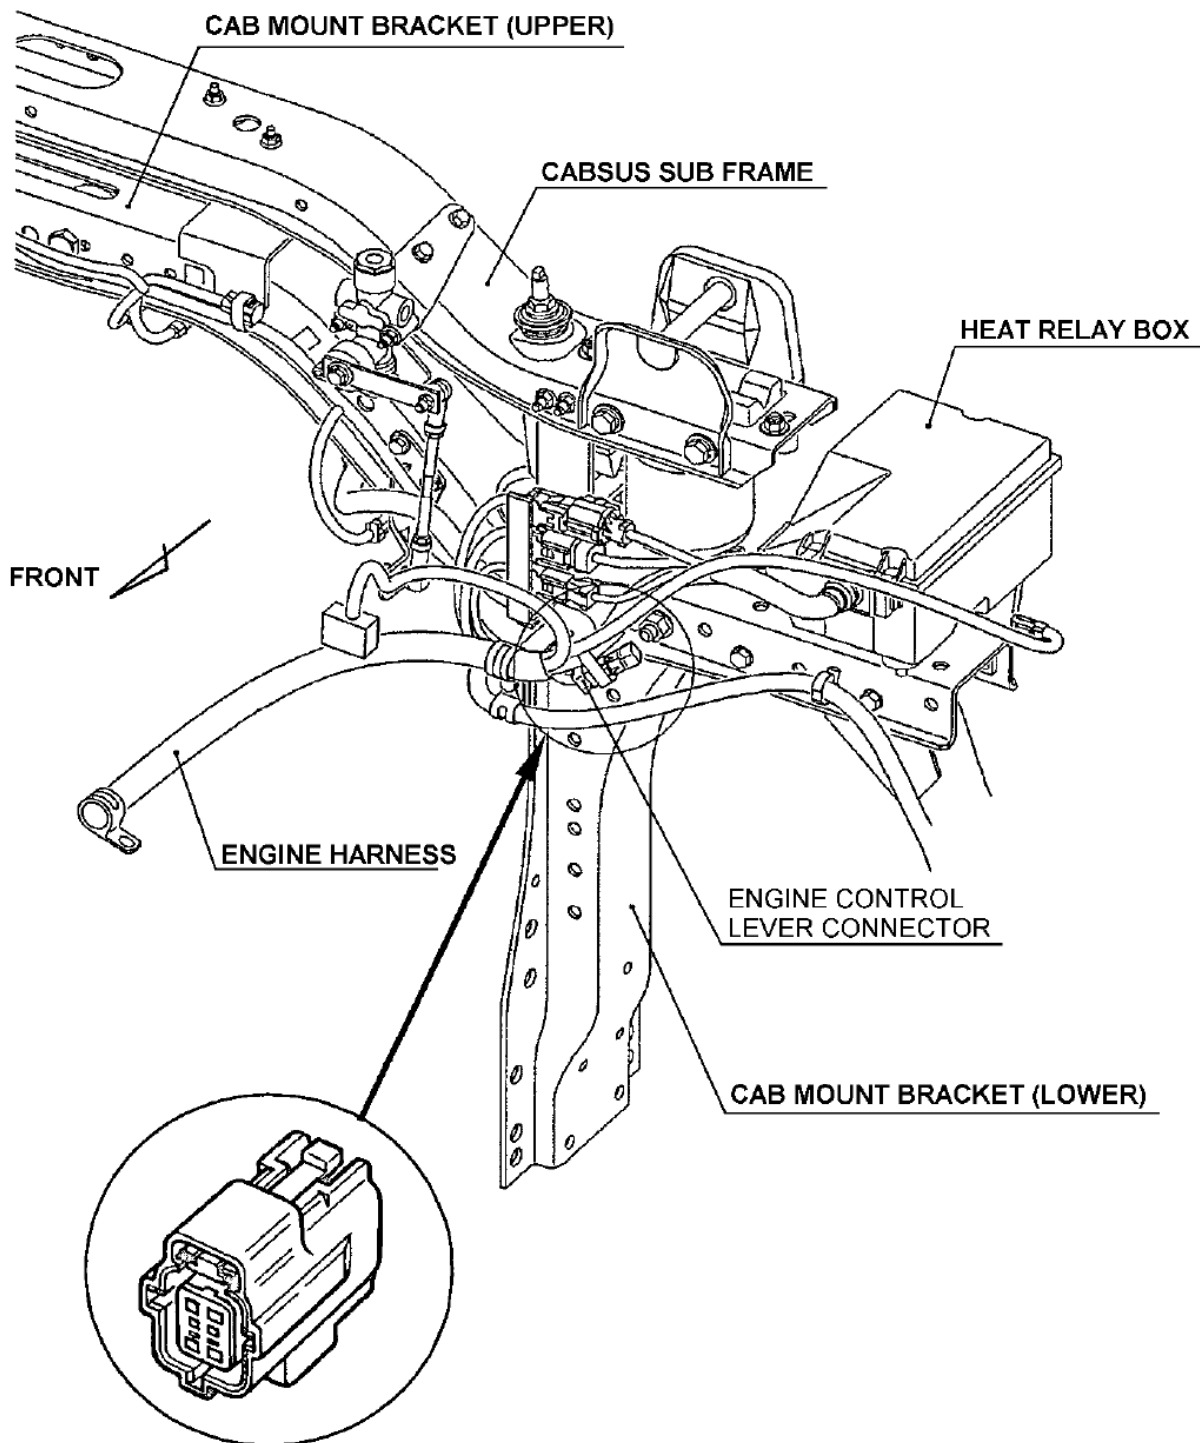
Engine Control Lever Installation Dimension (CWB)
